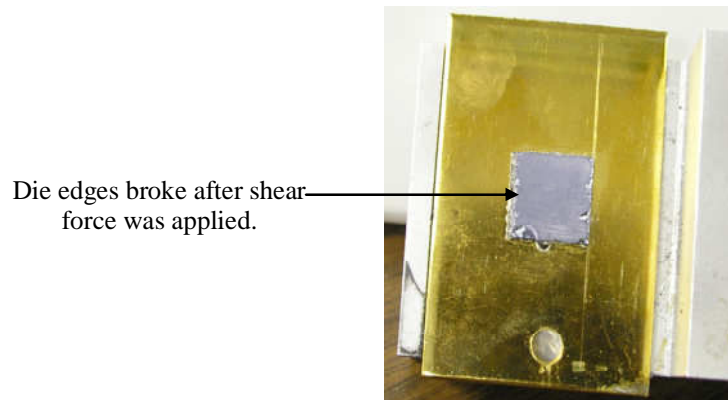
Cracked edges of the die with initial test of the fixture
